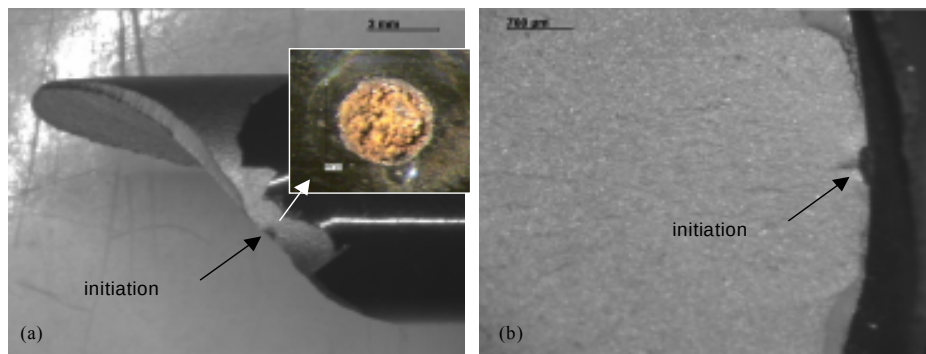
fracture produced by dissociated corrosion fatigue on a specimen of grade 45SCV6; (a) lateral surface with zoom view of the corrosion products; (b) fracture surface
